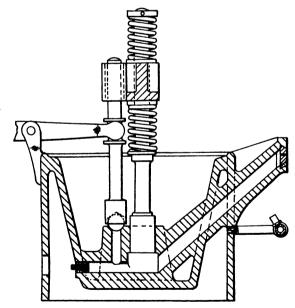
Granlype; multi-plunger pump. Vertical section. Scale: quarter size.
